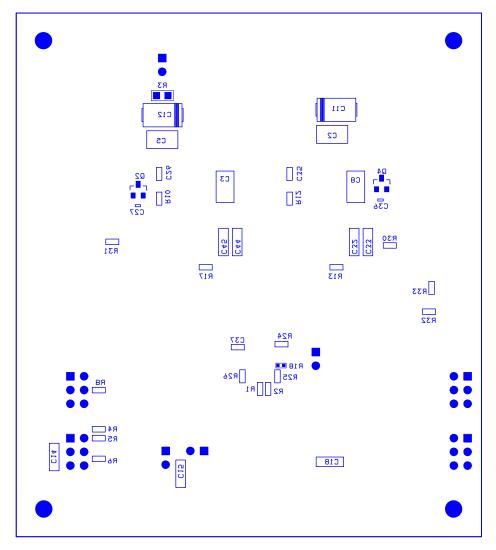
PCB - BOTTOM ASSEMBLY (TOP VIEW)
